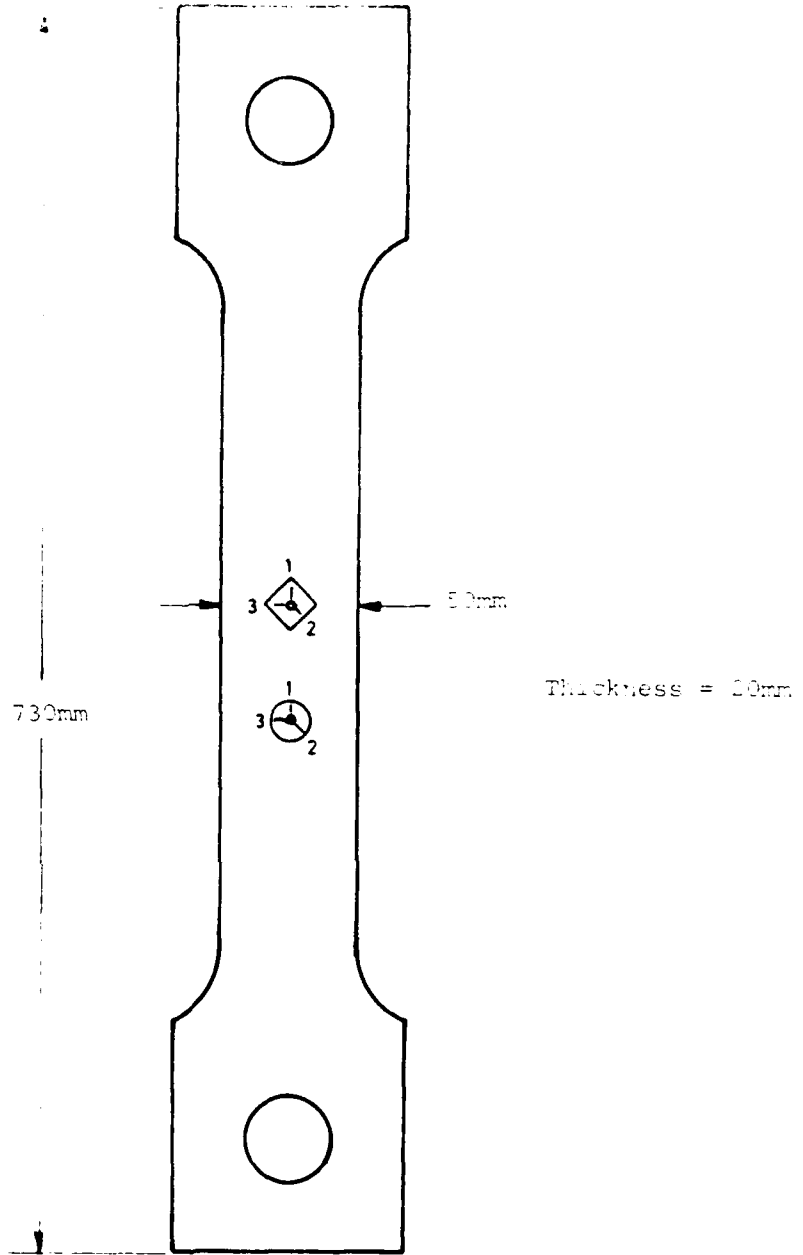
UNIAXIAL TENSILE LOADING SPECIMEN
